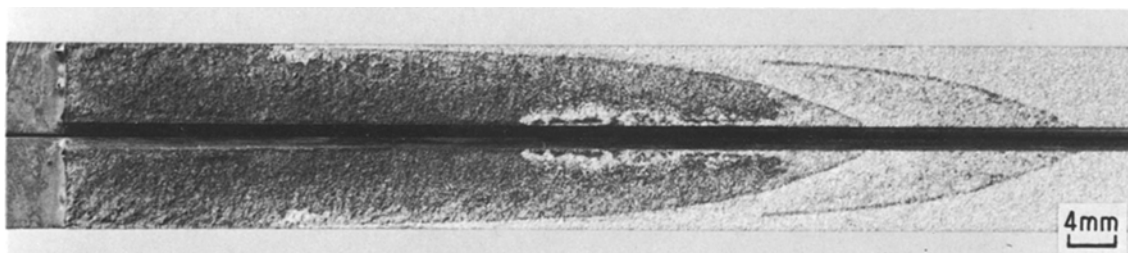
Fracture surfaces of double torsion test piece illustrating crack front geometry.
